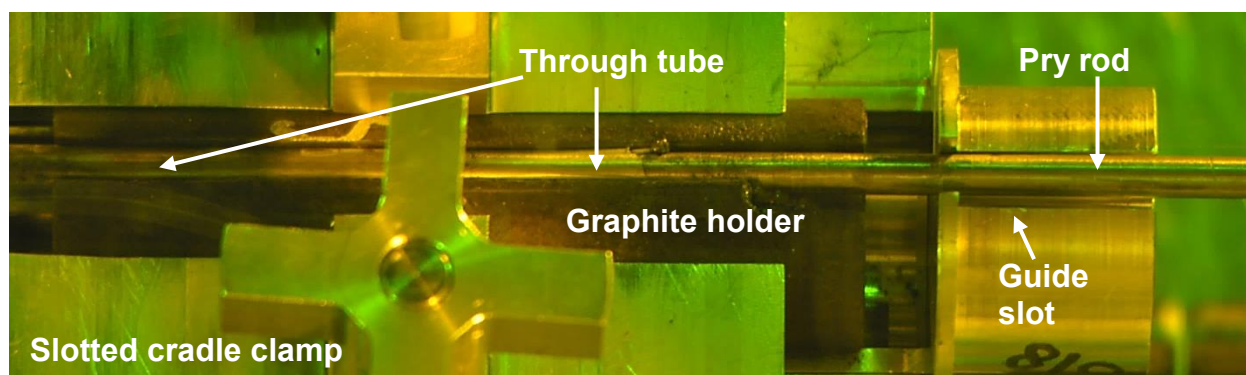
Mirror view of prying a through tube away from a holder base with a rod and special fixture.
